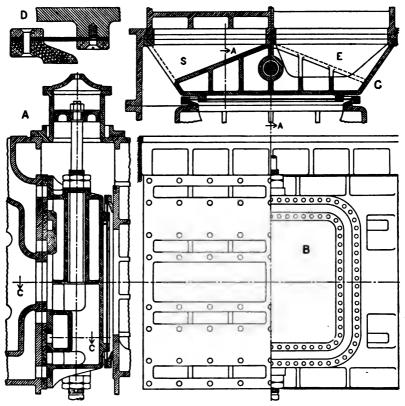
Valve for Low-pressure Cylinder of engine partly shown in Fig. 273 I. Scale 1 to 24 and 1 to 6.
